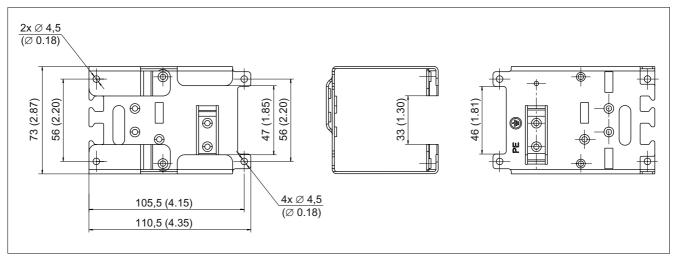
Dimension drawing of Screening Kit, frame size FSA, all data in mm and (inches)
